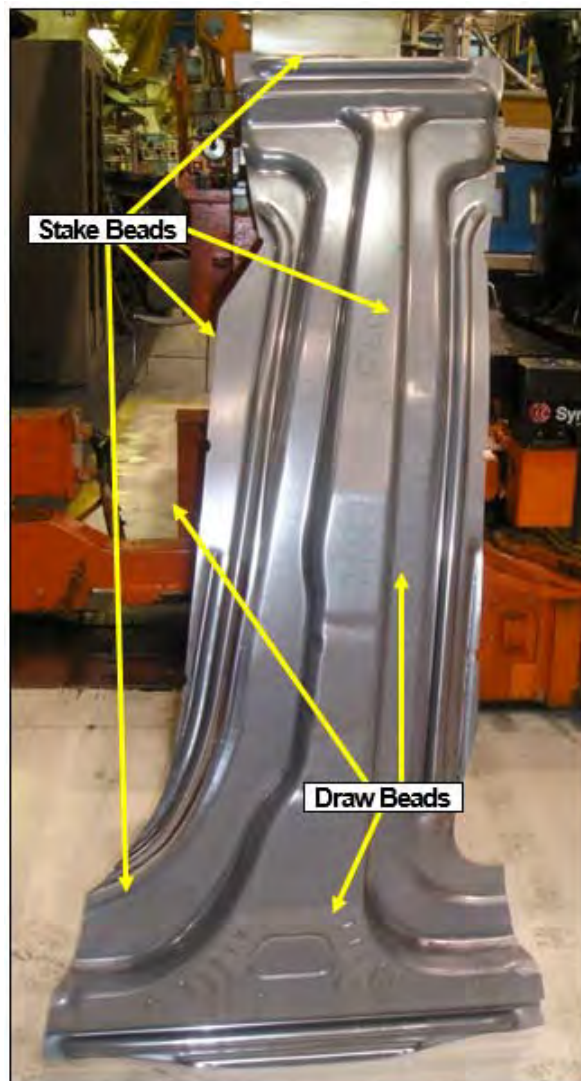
C-25: DP590 B-pillar with draw beads on the blankholder and stake beads on the punch.
